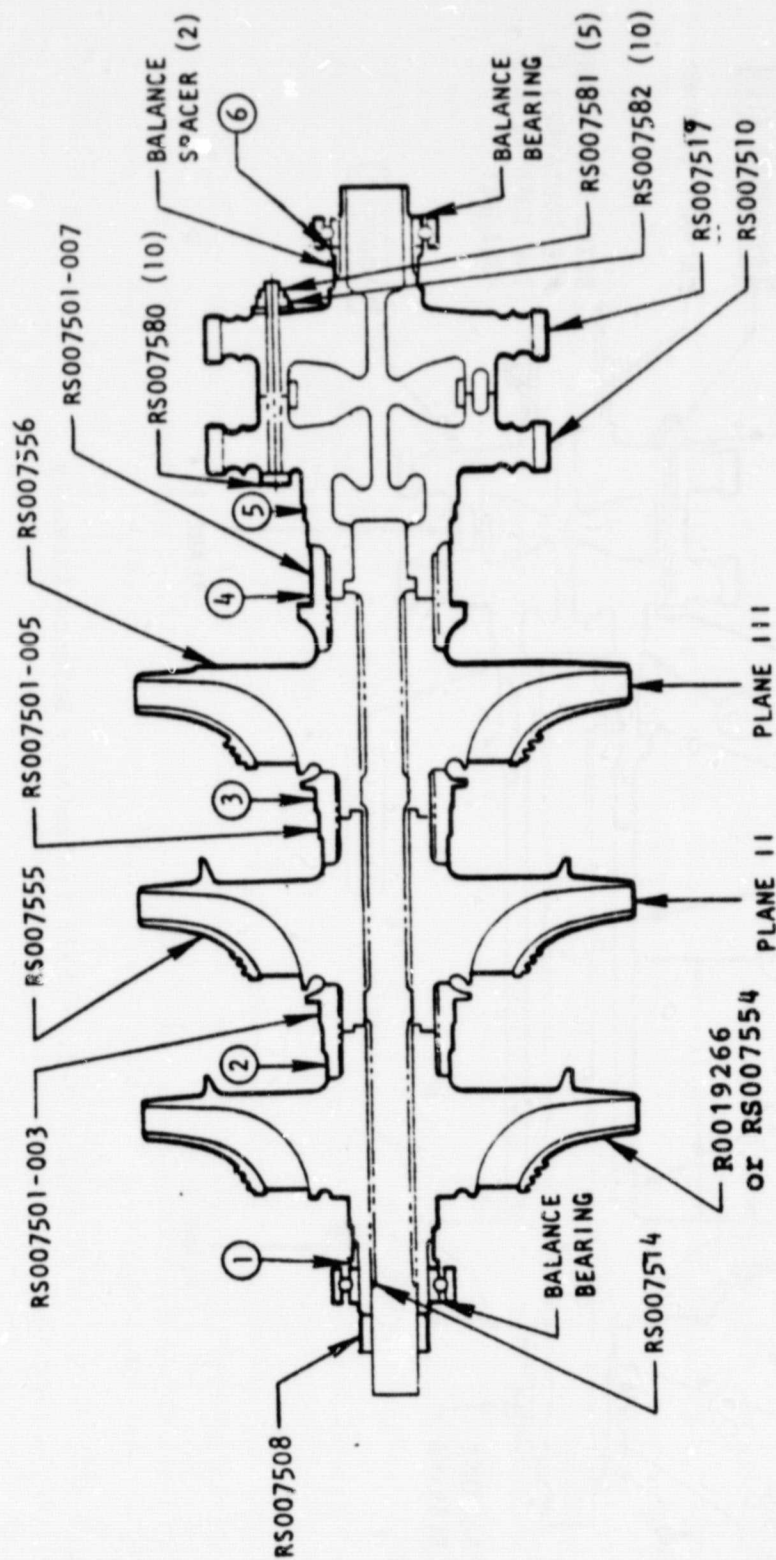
HPFTP Trial Assembly and Partial Balance Assembly
